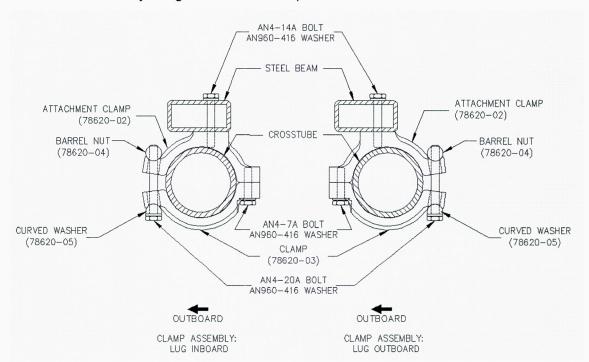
Beam Installation – Clamp Detail Lug Inboard and Lug Outboard Installations Shown
